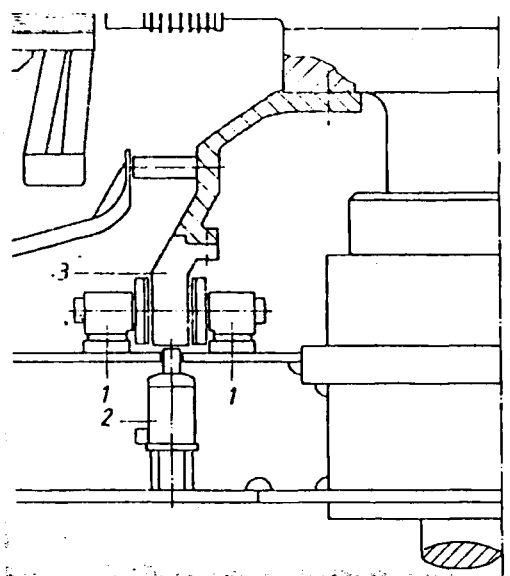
Arrangement of the braking and jacking cylinders on the lower bearing bracket. 1 braking cylinder, 2 jacking cylinder, 3 braking ring. (Drawing from Brown Boveri and Cie: Special issue: Synchronous machines for hydro electric power plants. Publ., no. CH-T 130082 E p. 39, Fig. 82). 1, 3 often combined.
